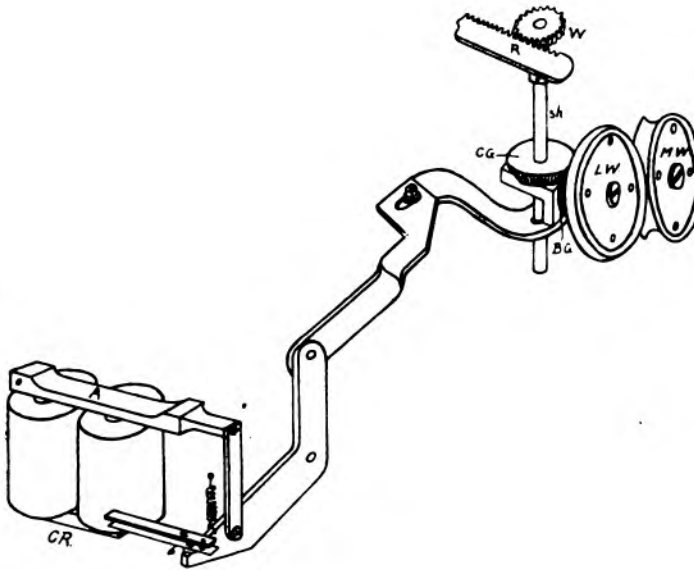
THE CARRIAGE RETURN MECHANISM.
